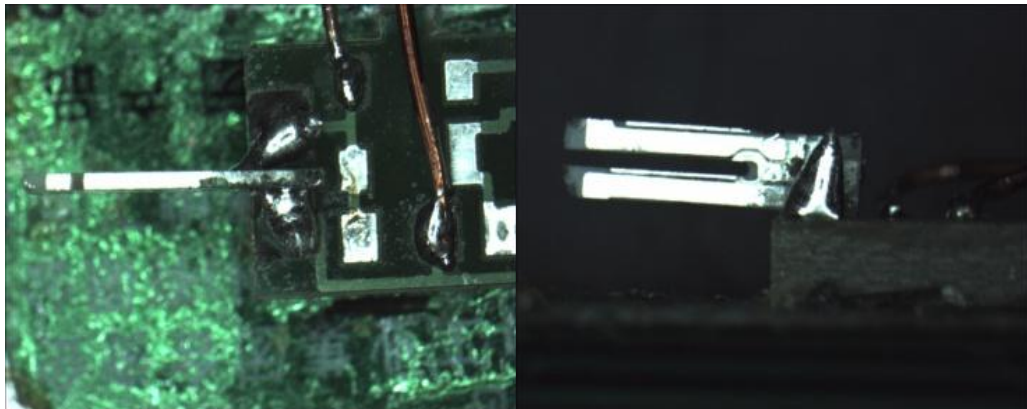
Procedure for connecting a gold wire to the tip - solder the TF to the PCB.
